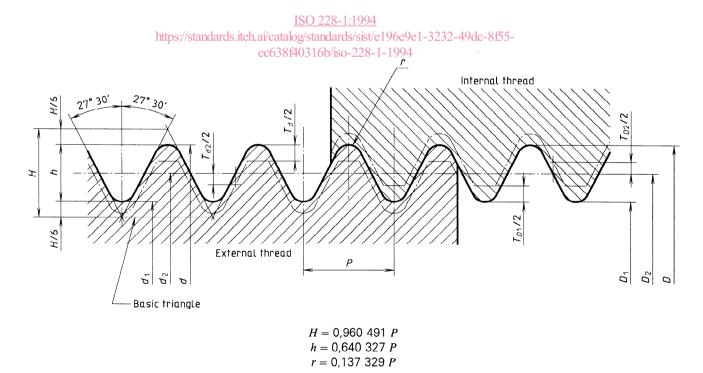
Truncated form thread profile and tolerance zones
